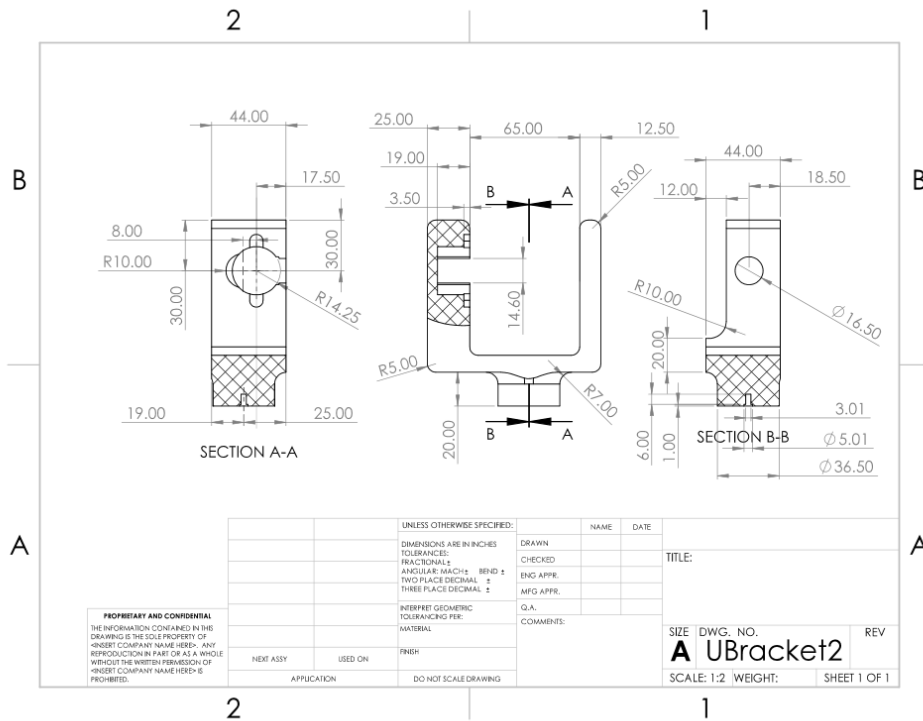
U-BRACKET DRAWINGS (DIMENSIONS IN INCHES)
